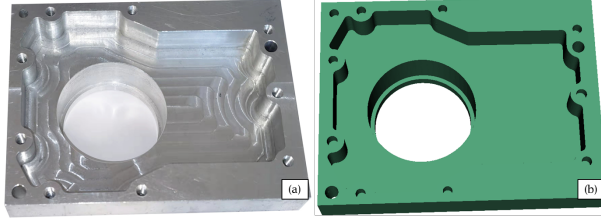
The pocket workpiece (a) and the nominal CAD model (b)
